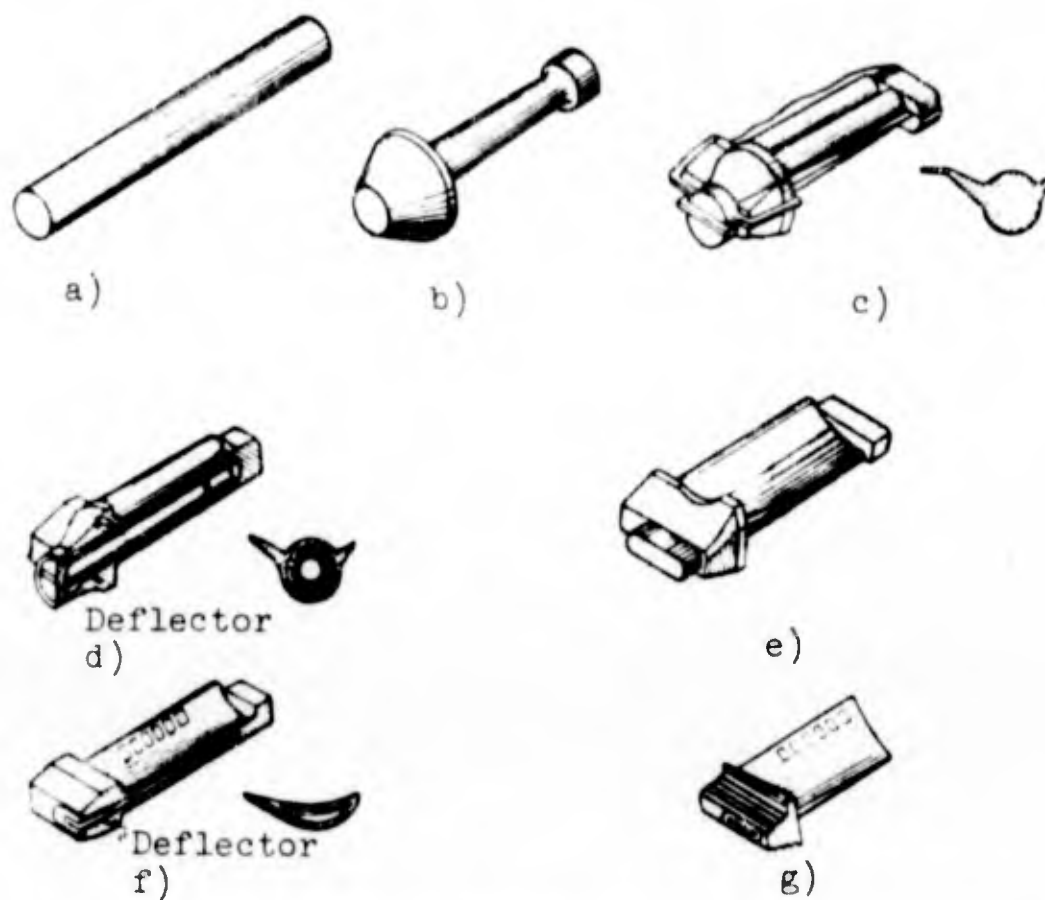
Diagram of manufacture of hollow single-channel cooled turbine blades. a) initial blank; b) heading and turning of rod; c) drop forging of intermediate blank; d) machining and assembly of blank with deflector and fillers; e) drop forging of blade; f) machining and etching out of filler; g) final machining.
